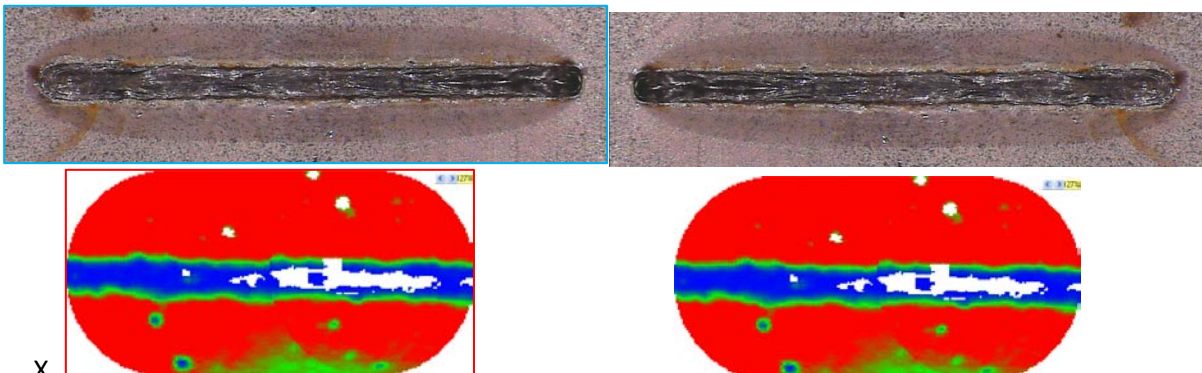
Weld top bead (0.1mm gap, sample A) and Amstech result from top bead (L) and bottom bead (R)
